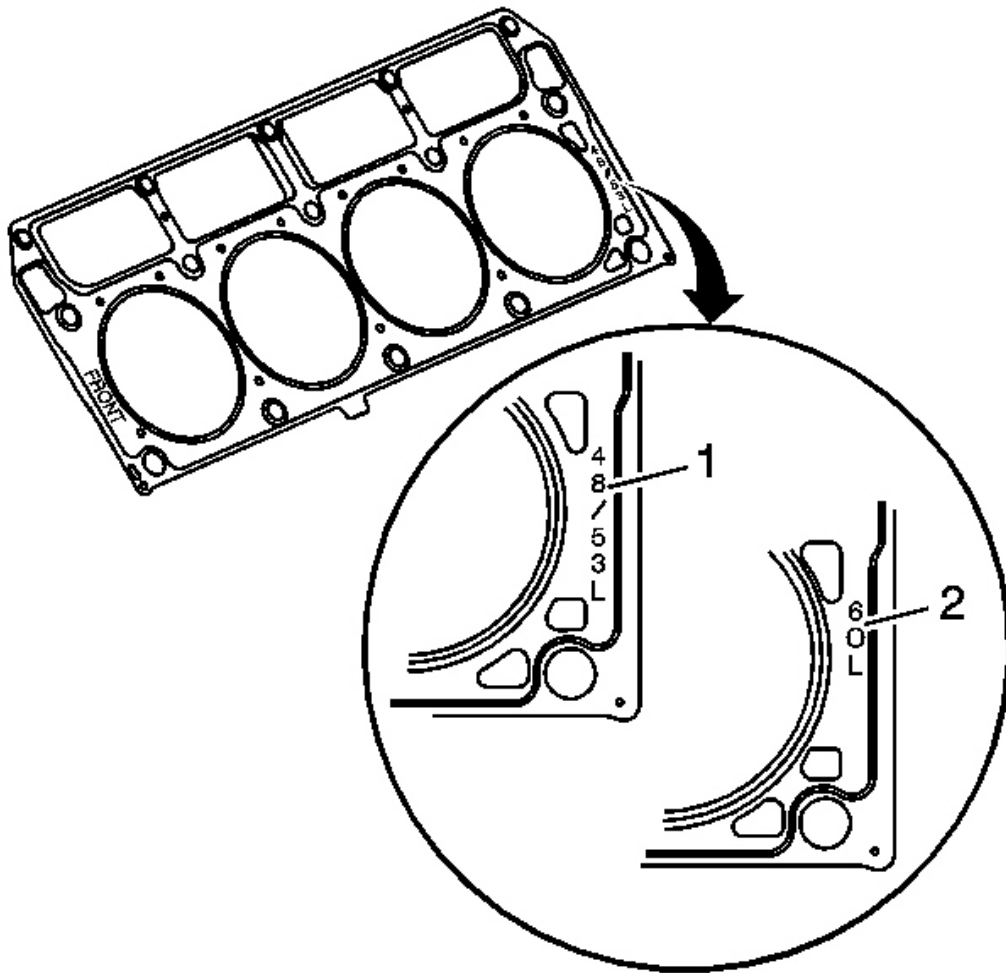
View Of Cylinder Head Gasket Displacement Markings
